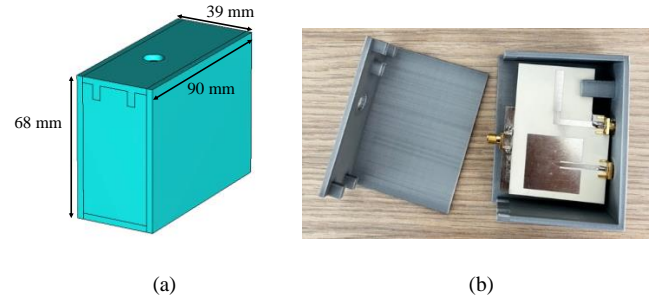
(a) 3D view of the simulated case with its dimensions, and (b) photo of take apart fabricated prototype.
